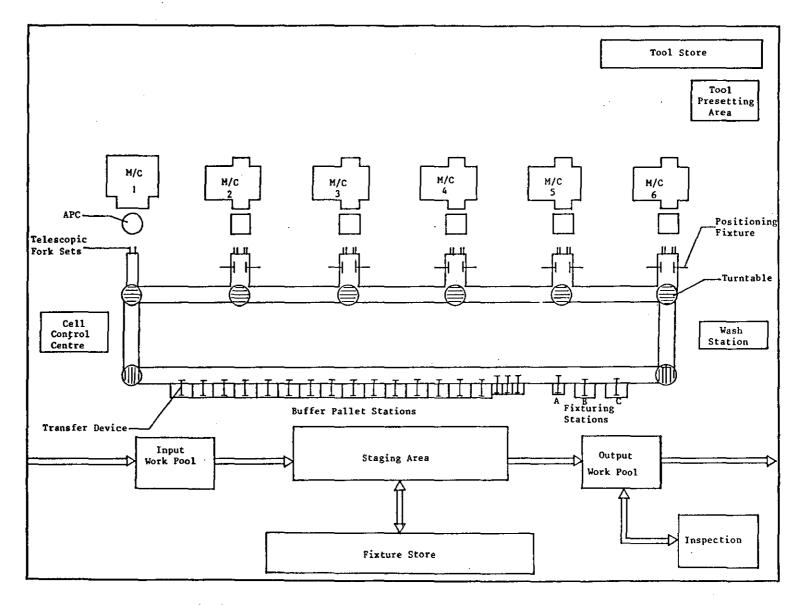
FMS D with CNC Machines, 2 Pallet APC, Conveyor System
